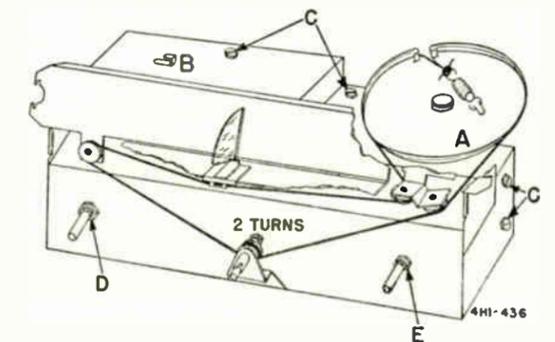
Radio Tuner Showing Chassis Cover and Dial Assembly.
